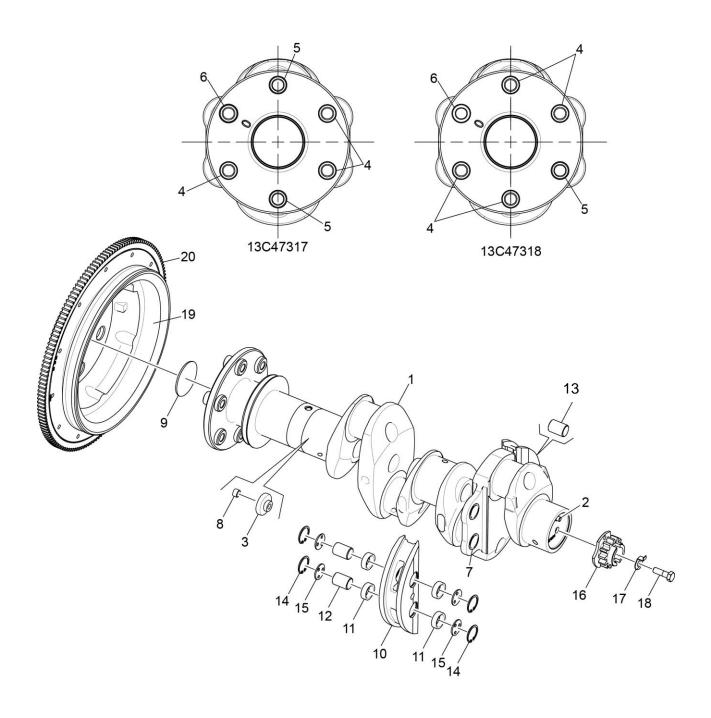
Crankshaft and Counterweight Assembly and Related Parts
